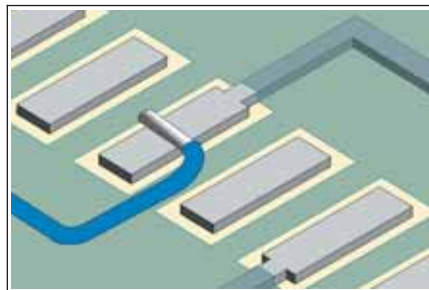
Not Recommended Wire perpendicular to conductor; contact, SMT pad.
